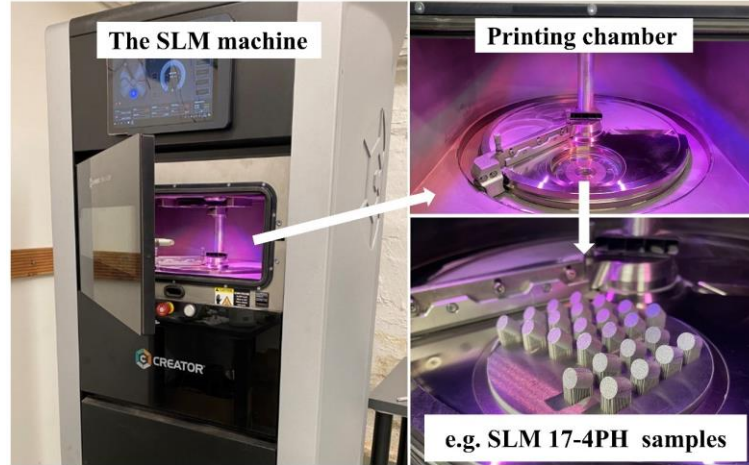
The creator SLM machine for printing SLM 17-4PH samples
